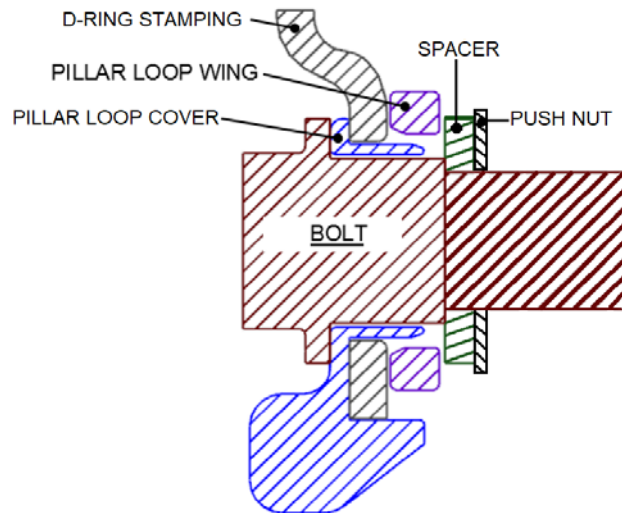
Cross-Sectional View of D-Ring Assembly of Fig. 1
